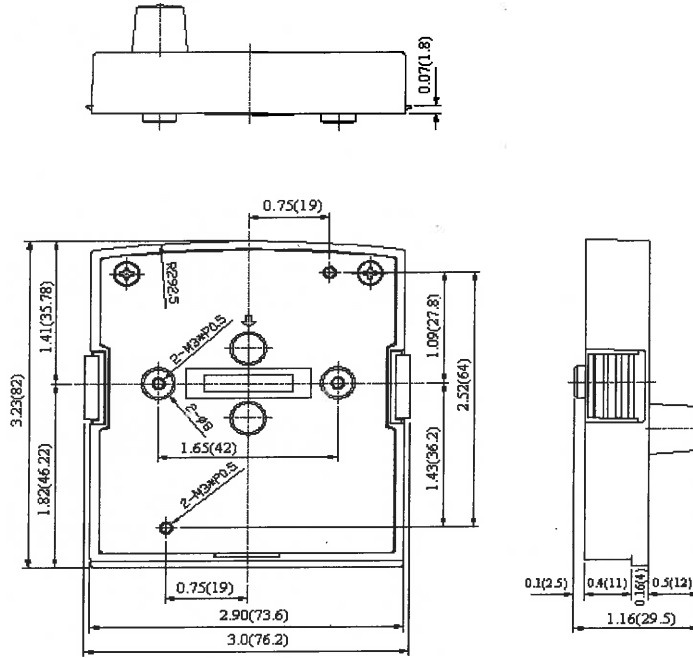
LED Keypad (N3-LED) Mounting Dimensions
